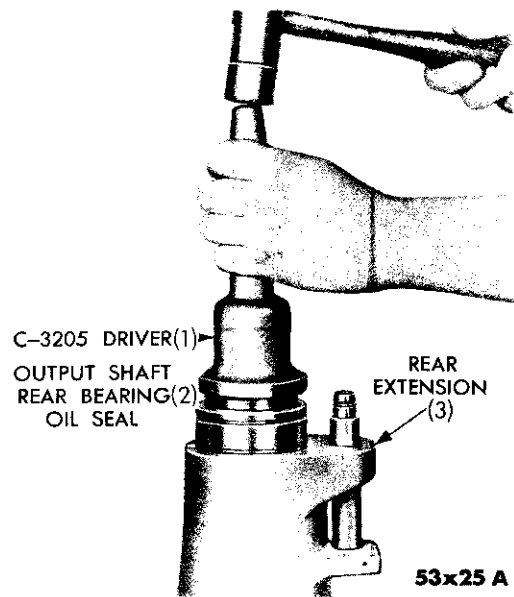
Installing Output Shaft Rear Bearing Oil Seal
